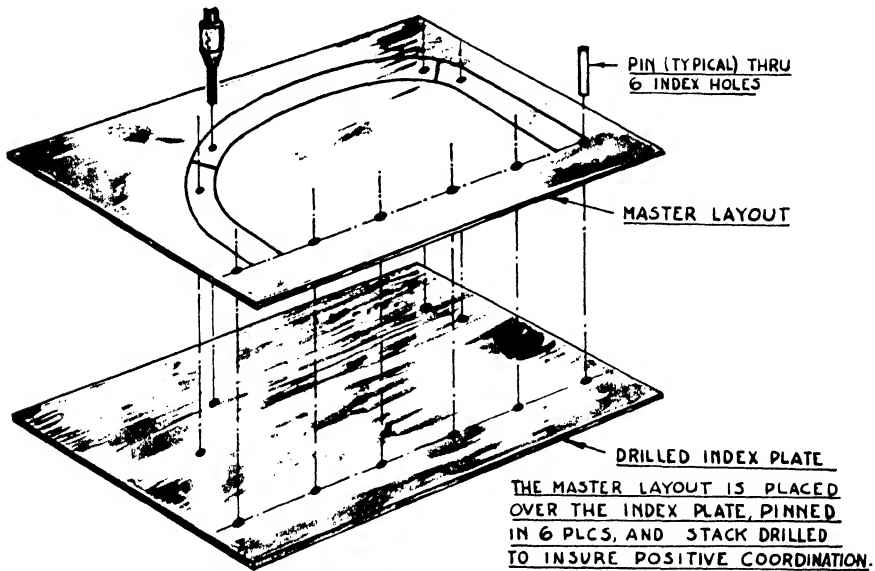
Stack Drilling Tooling Holes in Index Template.
